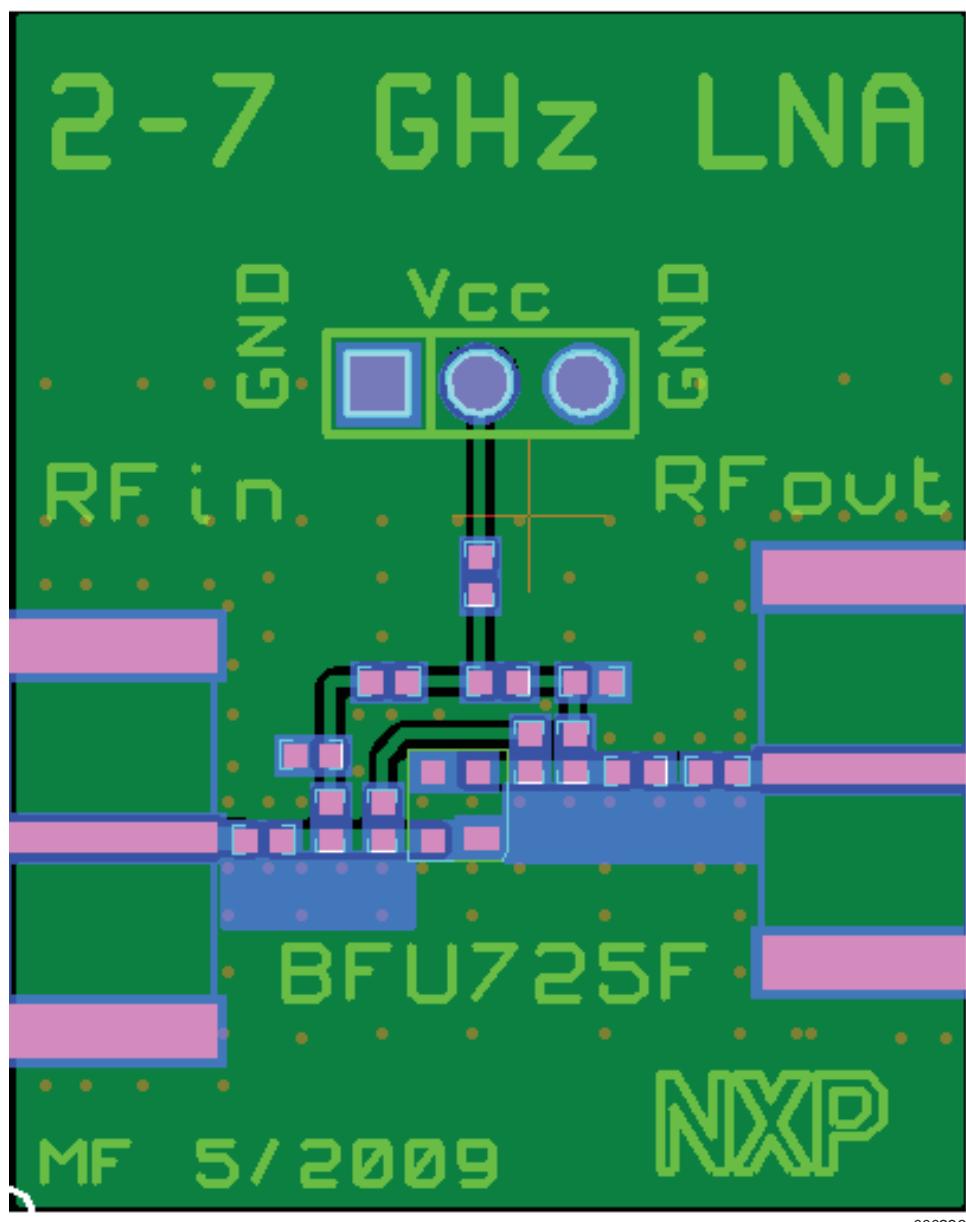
Printed-circuit board of the BFU725F/N1 2.4 GHz to 6 GHz demo board
